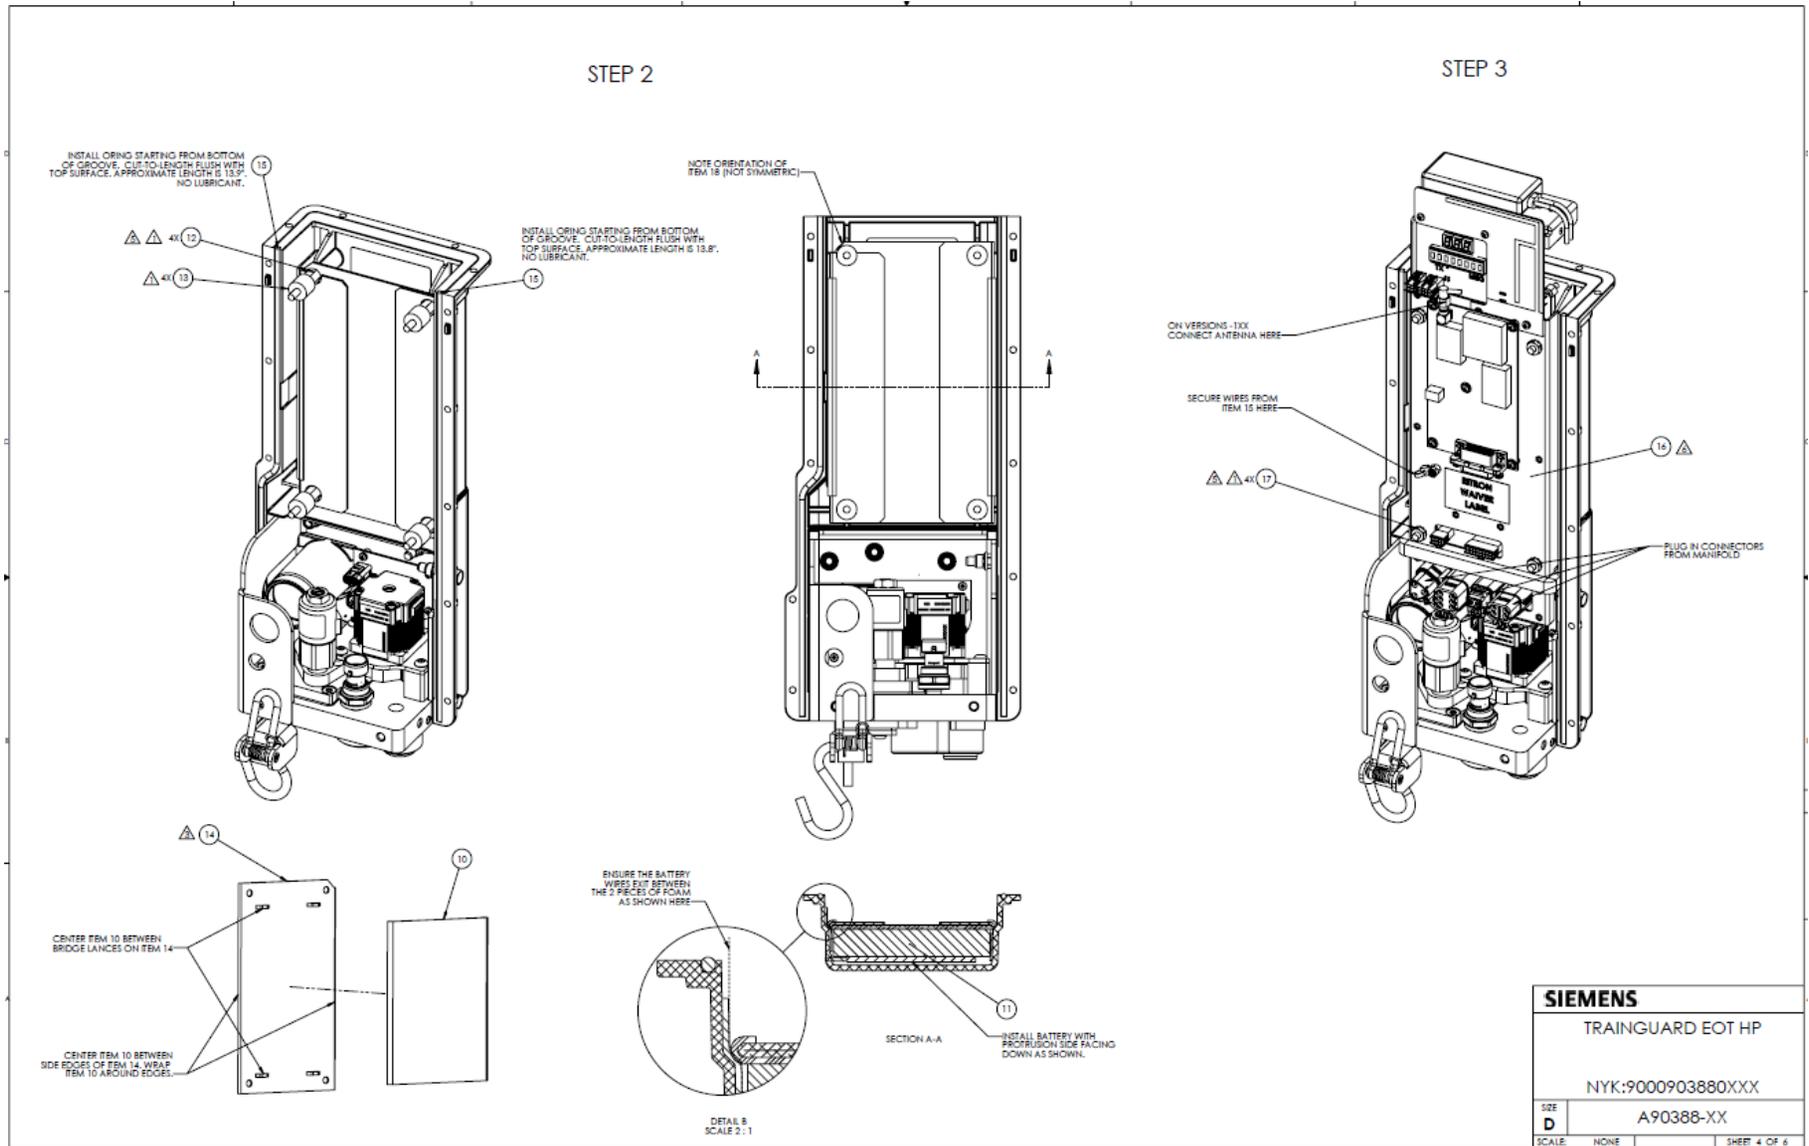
Main Assembly with HP Manifold, A90388 Sheet 4
